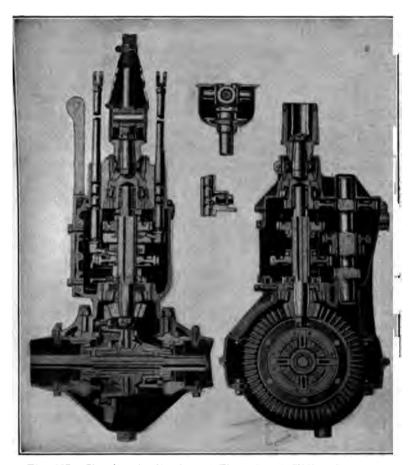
Showing Application of Three Speed Sliding Gearset to Studebaker Rear Axle.
